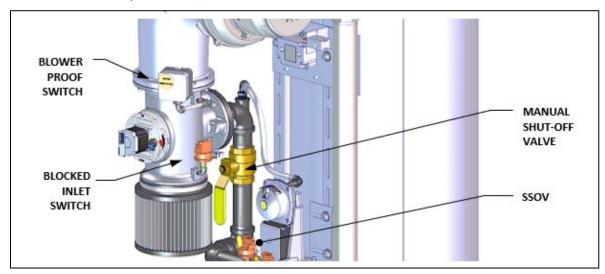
Blower Proof & Blocked Inlet Switch Locations
